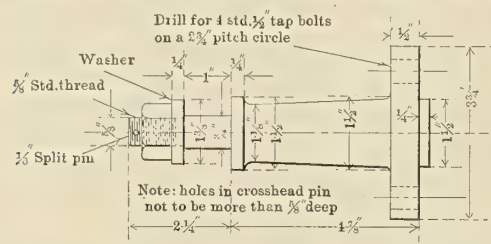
CROSS-HEAD STUD FOR L. P. ENGINE. MAKE ONE OF MILD STEEL.
